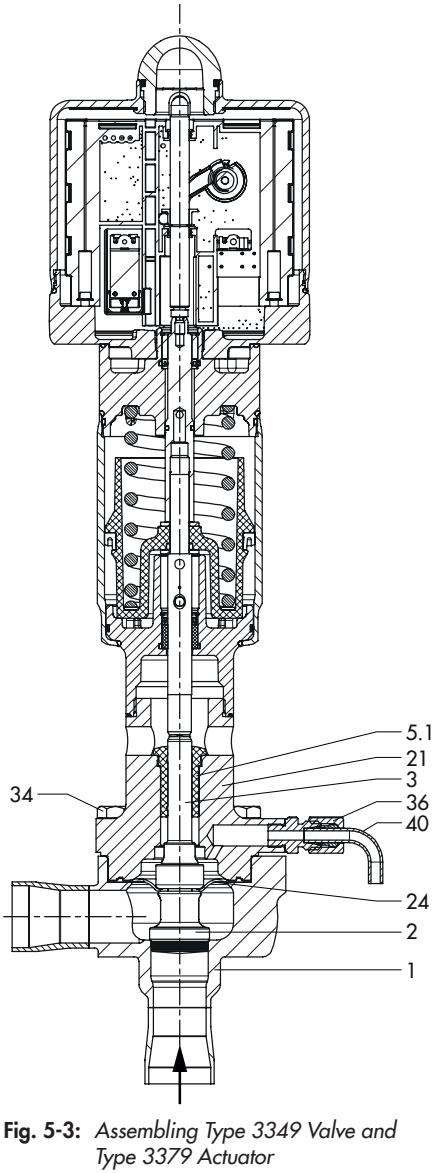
Assembling Type 3349 Valve and Type 3379 Actuator
